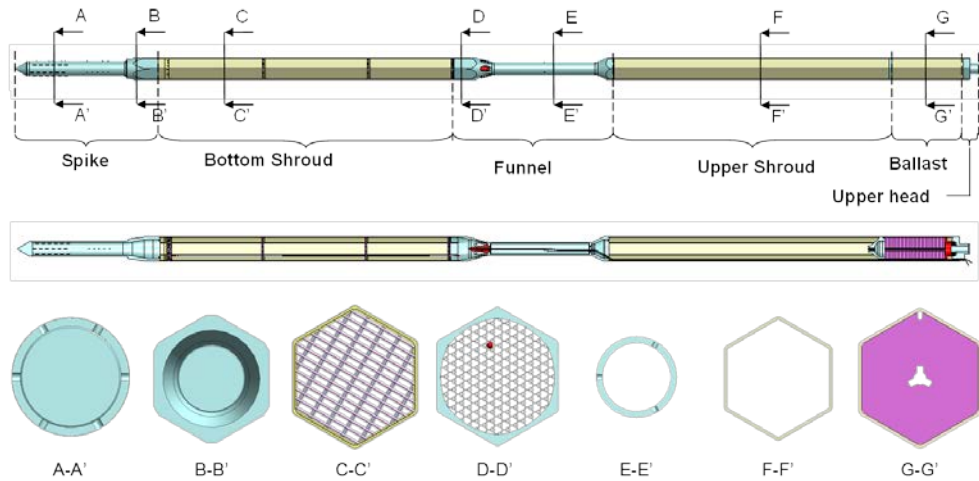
Cross-section view of the ELFR Fuel Assembly.
